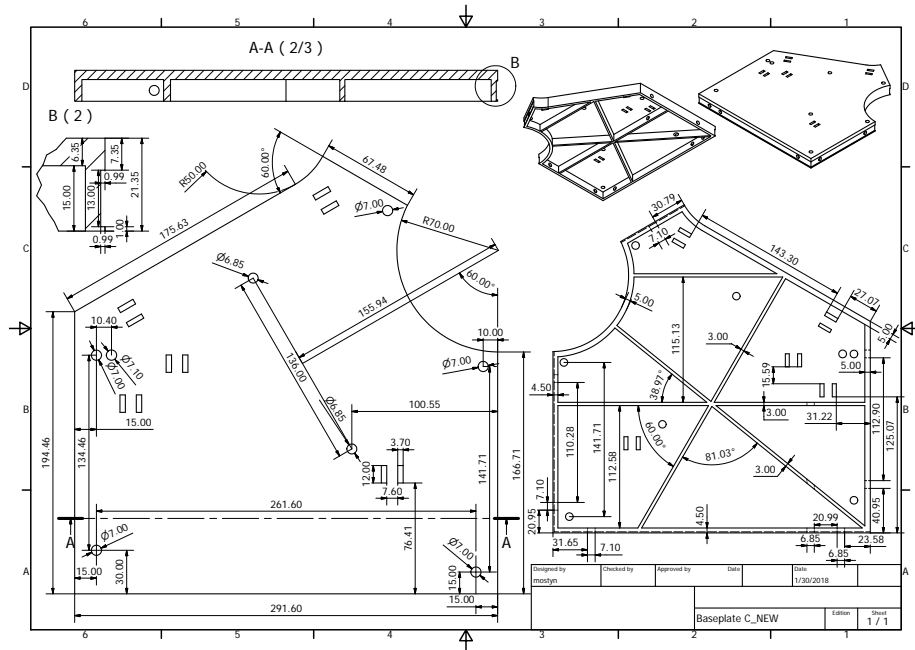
Segment "C" of mounting board. Segment "B" is symmetric
